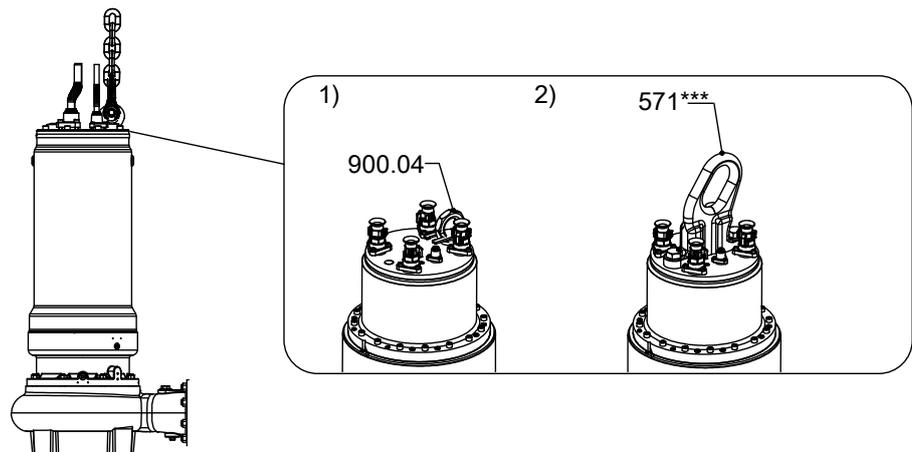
Attaching the lifting chain / lifting rope – dry installation
